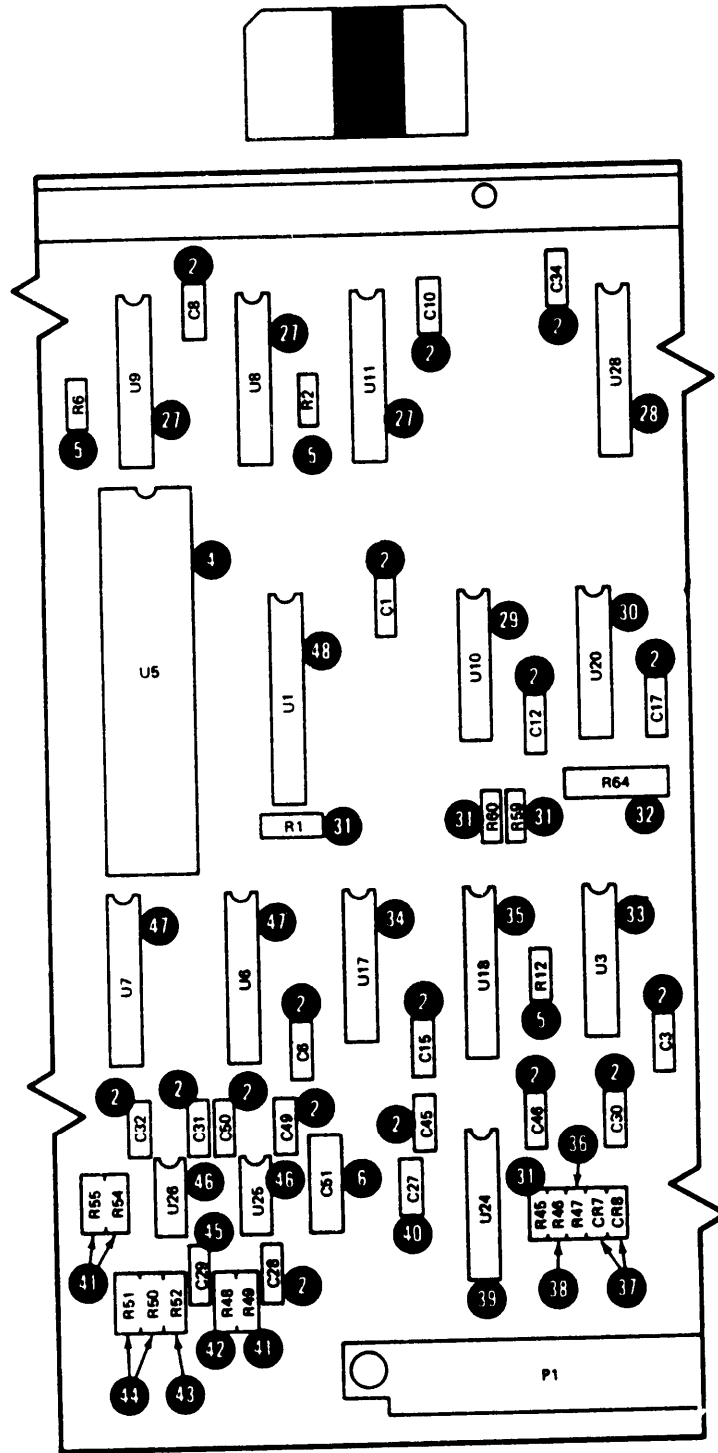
VIDEO DATA PROCESSOR CIRCUIT CARD ASSEMBLY
